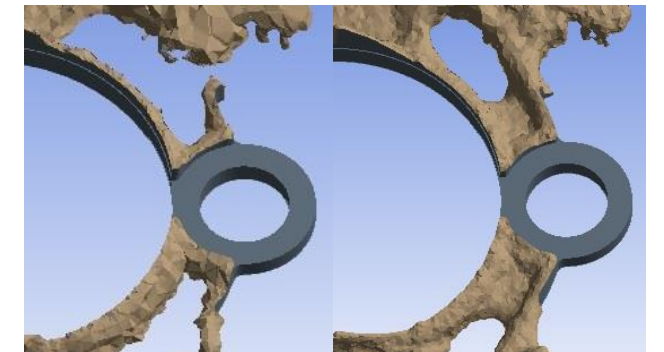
Geometry improvement thanks to additional mechanical loads
